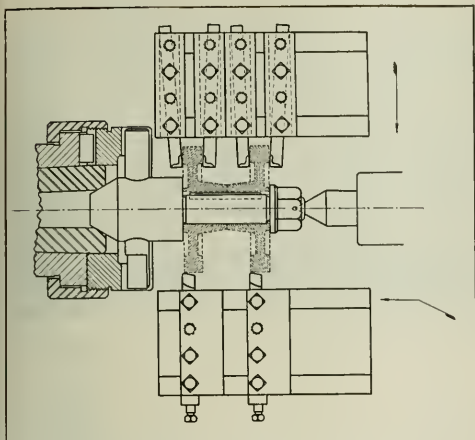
Tooling Equipment for a Job in which Two Gears are finished at One Time
